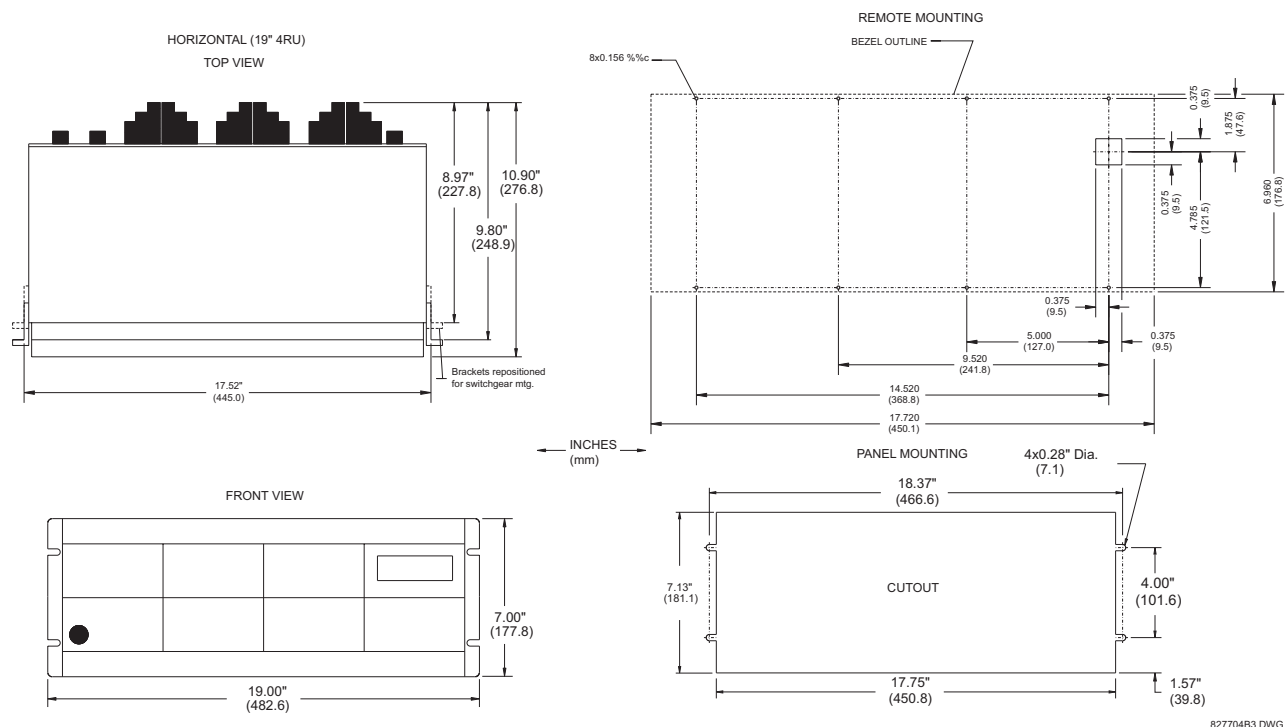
D60 HORIZONTAL MOUNTING AND DIMENSIONS
